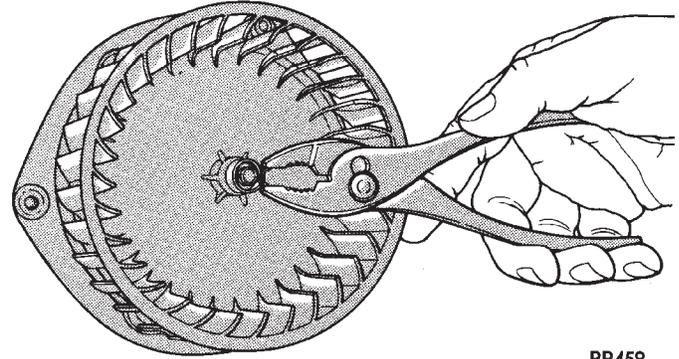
Blower Wheel Retaining Ring Removal and Installation
